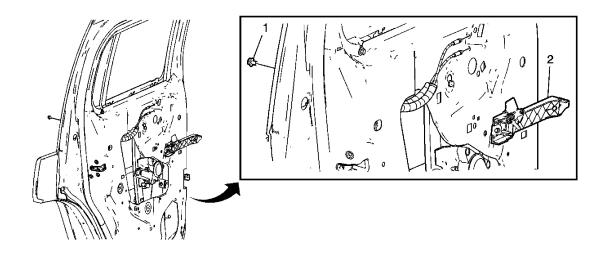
Rear Side Door Outside Handle Housing Replacement Courtesy of GENERAL MOTORS CORP.
